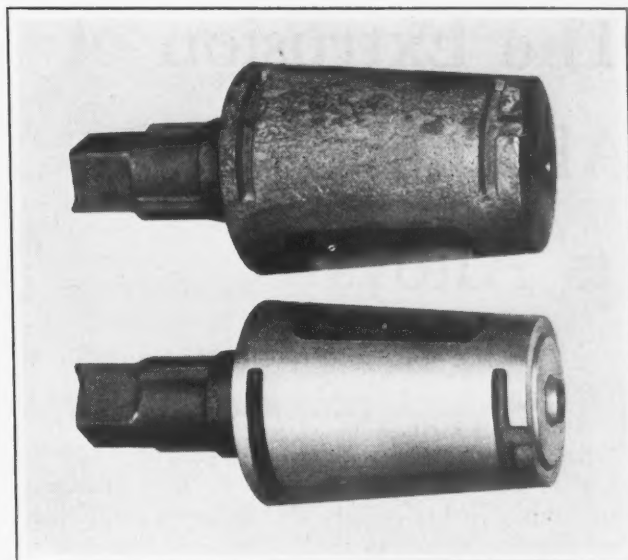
(Above) Cast-steel Valve Plug in the Rough. (Below) Plug with Taper Turned and Ends Faced by Lathe Shown in Fig. 4
